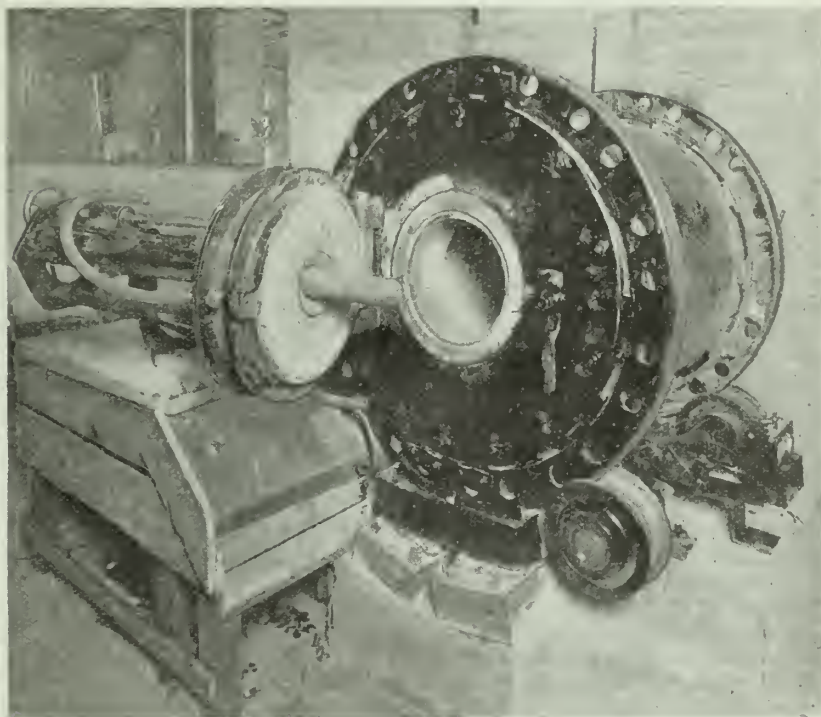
SHOWING METHOD OF CHARGING FURNACE.
